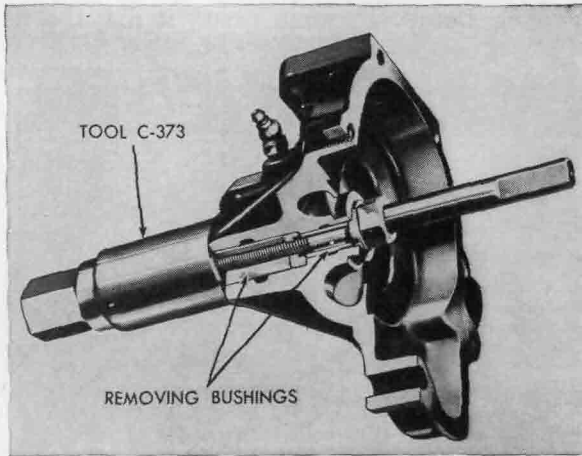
Removing bushings from water pump with special tool. (Plymouth Division of Chrysler Corporation)
